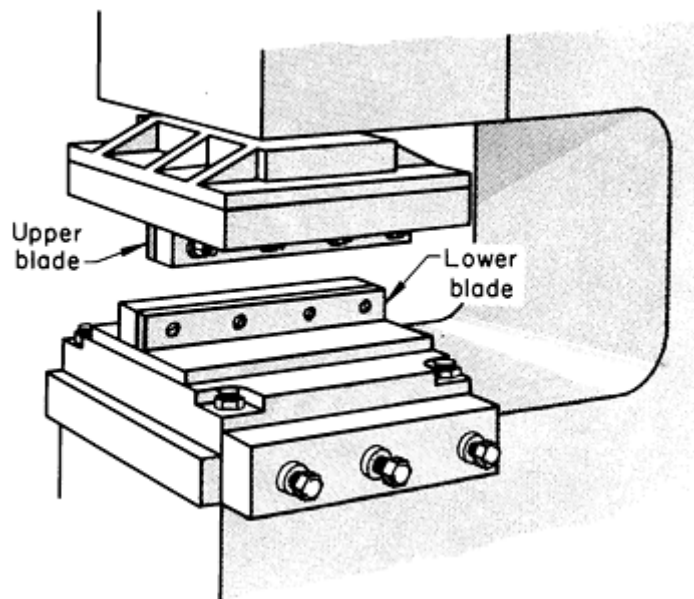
OPEN-END GUILLOTINE IRON-WORKING MACHINE
